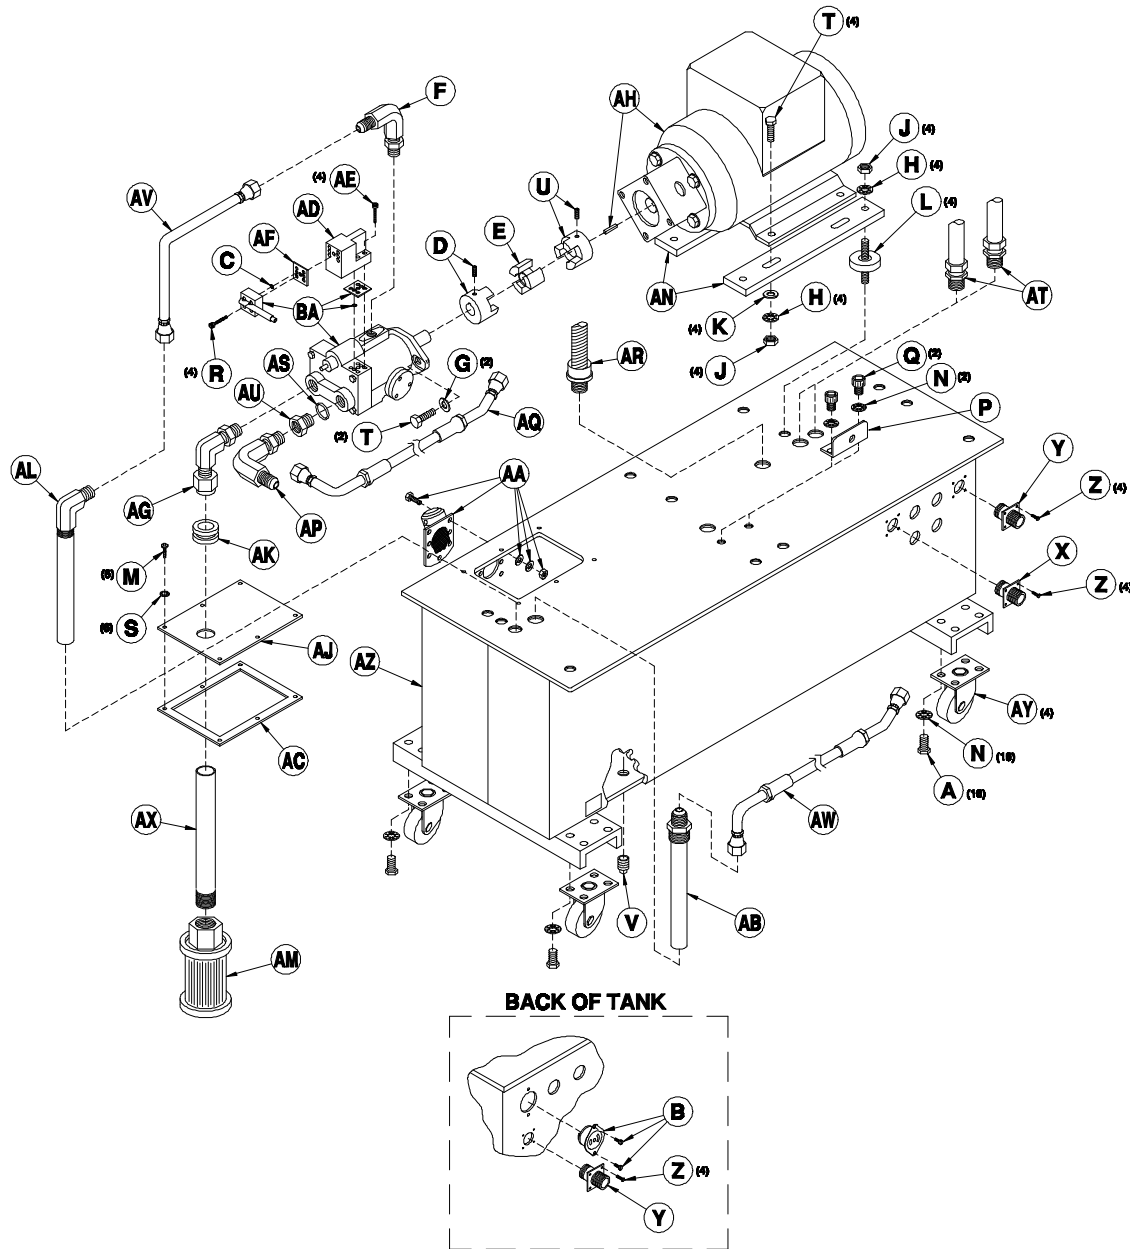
Base Assembly (Part No. 15501-SIZE) (IHTC ASSY SHOWN) Exploded View
